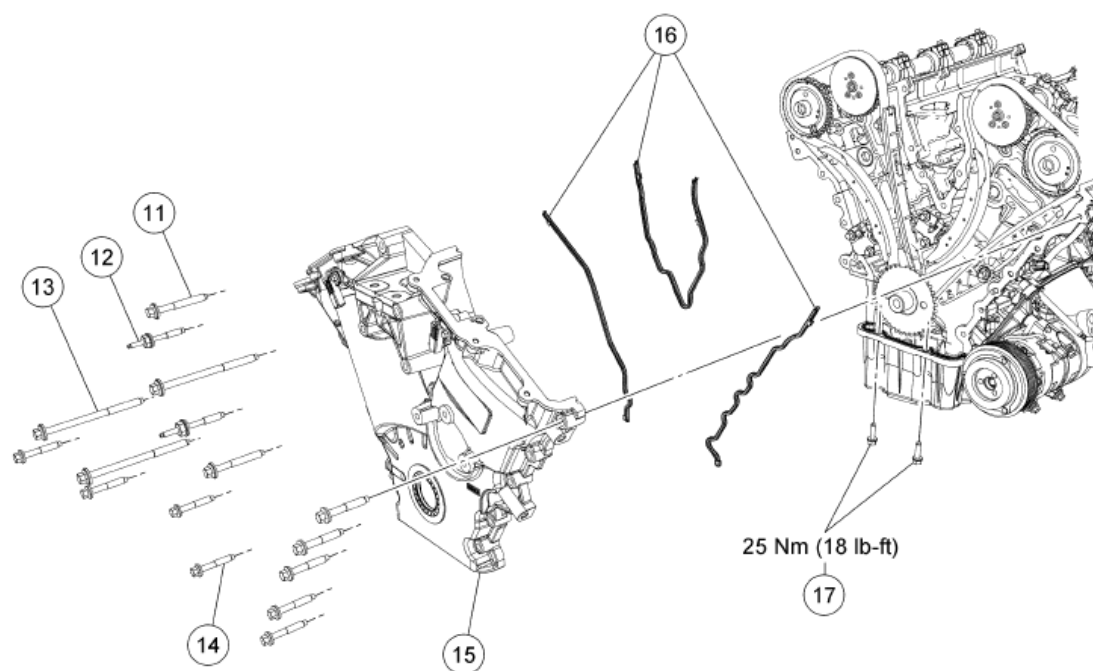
Identifying Engine Front Cover (2 Of 3)
